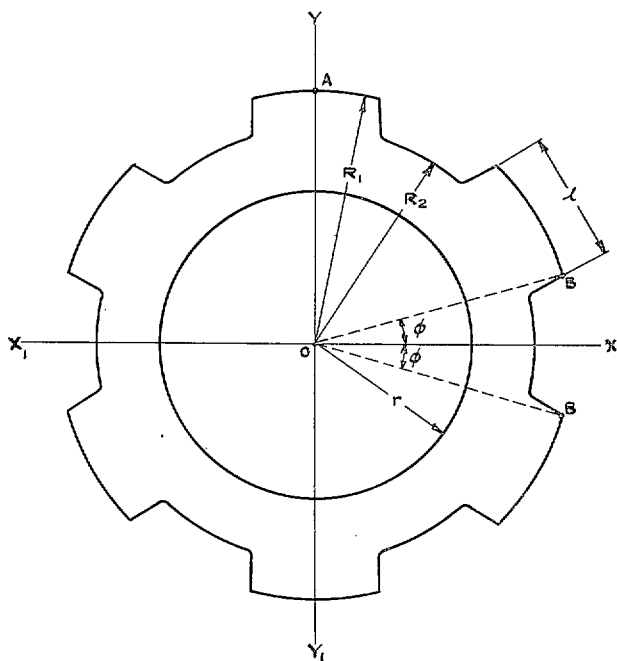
Cross-section at the minimum diameter of the Splined Specimen.
